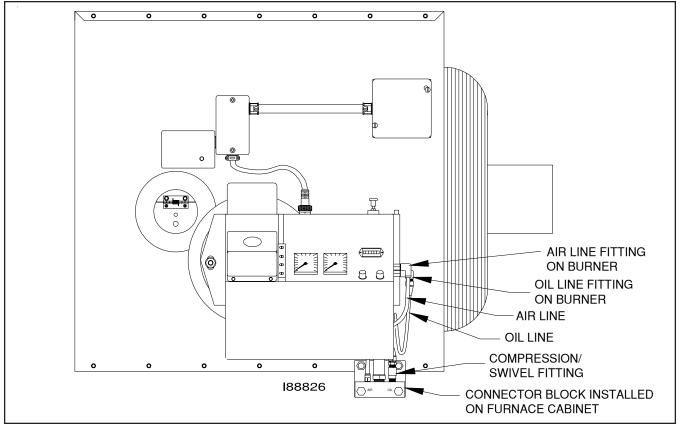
H - Installation of Connector Block, Oil Line, and Air Line (Front View)
